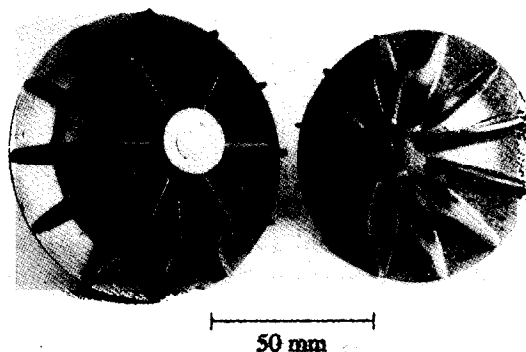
Rotors, as-moulded (left) and after sintering. Radial cracks appear after pyrolysis of the large section (note the crack at 2 o'clock).
